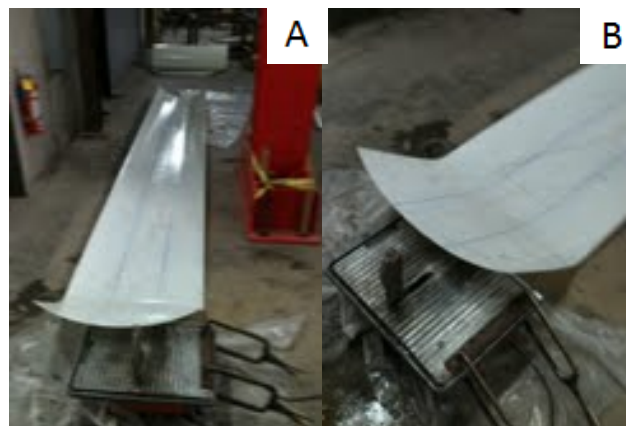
A) Cutting GFRP, B) Wet Saw
